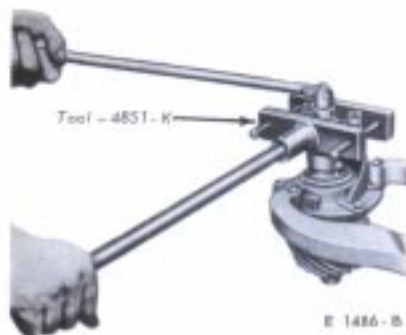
Typical Drive Pinion Shaft Nut Removal or Installation
